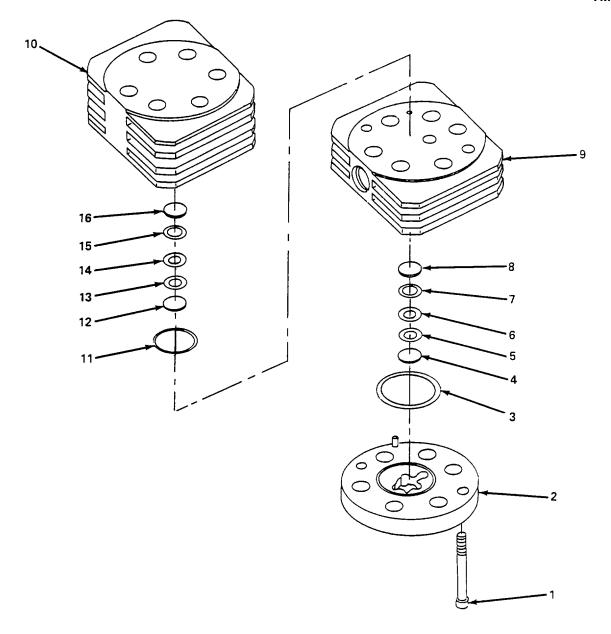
Third Stage Valve Head Assembly, Repair.
